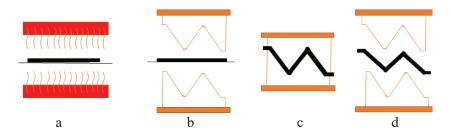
Schematic of the steps in thermostamping of thermoplastic composites: (a) The composite blank (in black) is placed between two infrared heaters. (b) The composite blank is quickly (within a few seconds) transferred to a space between two heated half-molds. (c) The heated half-molds are closed to form the shape. (d) After a few minutes, the half-molds are opened, and the part is removed from the mold.
